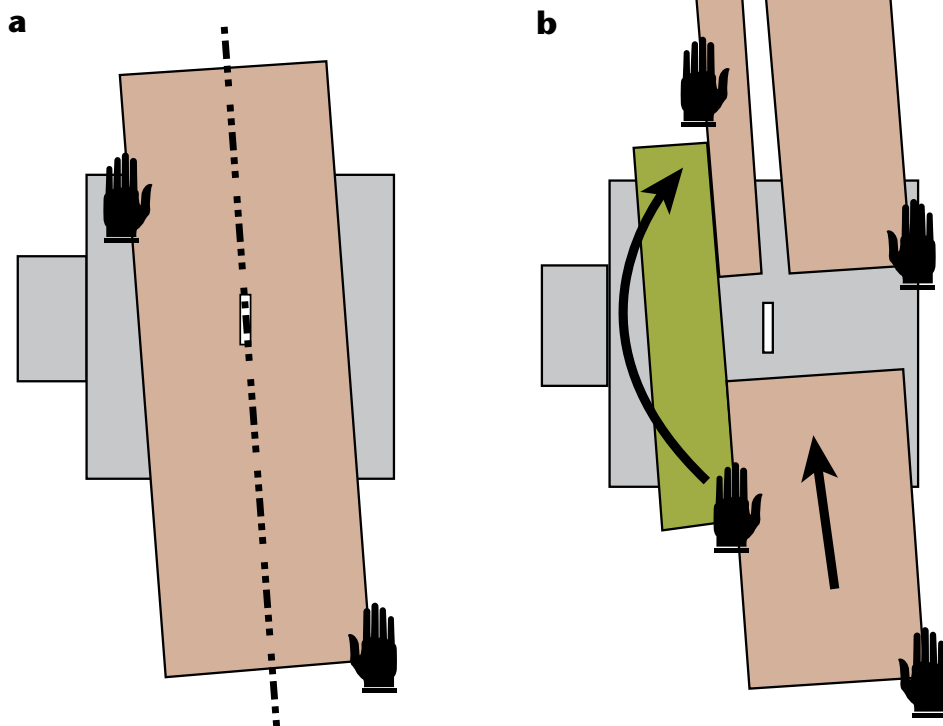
(a) The operator's hands are placed correctly to avoid the danger zone. (b) If cutting a long board, the cut can begin with hands placed as shown in the lower portion of this illustration. As the cut proceeds, move your left hand to the back side of the blade, as shown on the top of this illustration.
